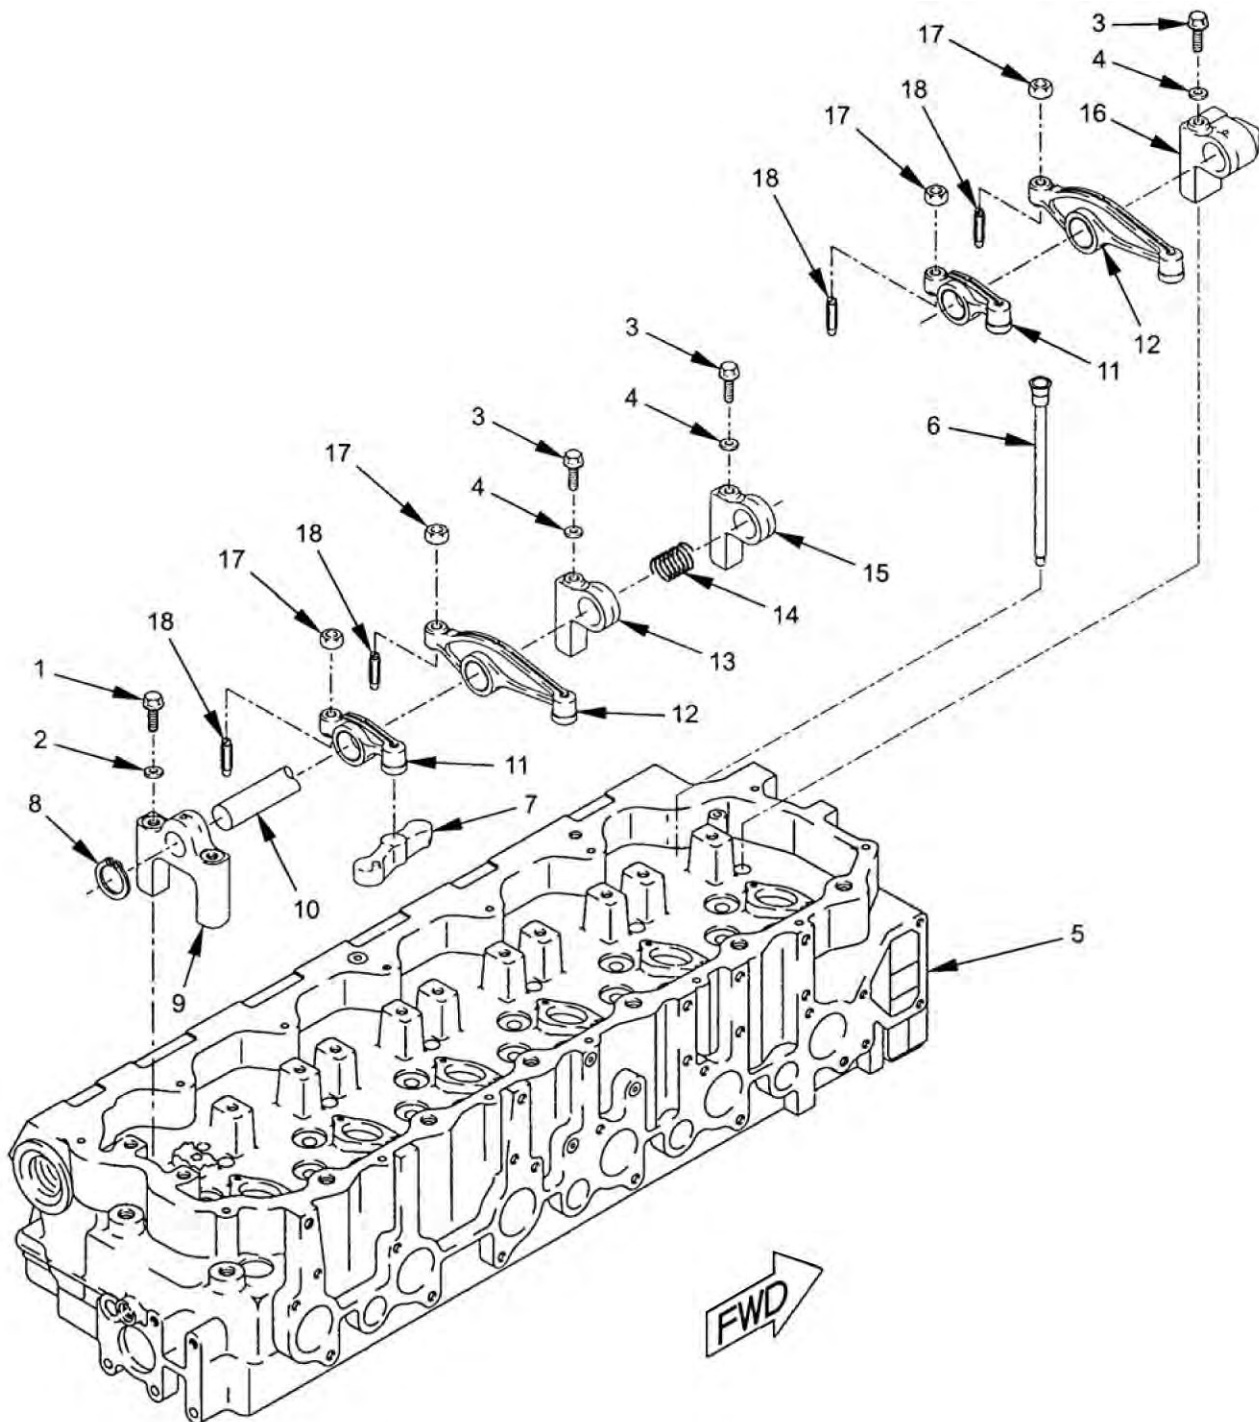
Rocker Shaft and Pushrods Removal and Installation.
